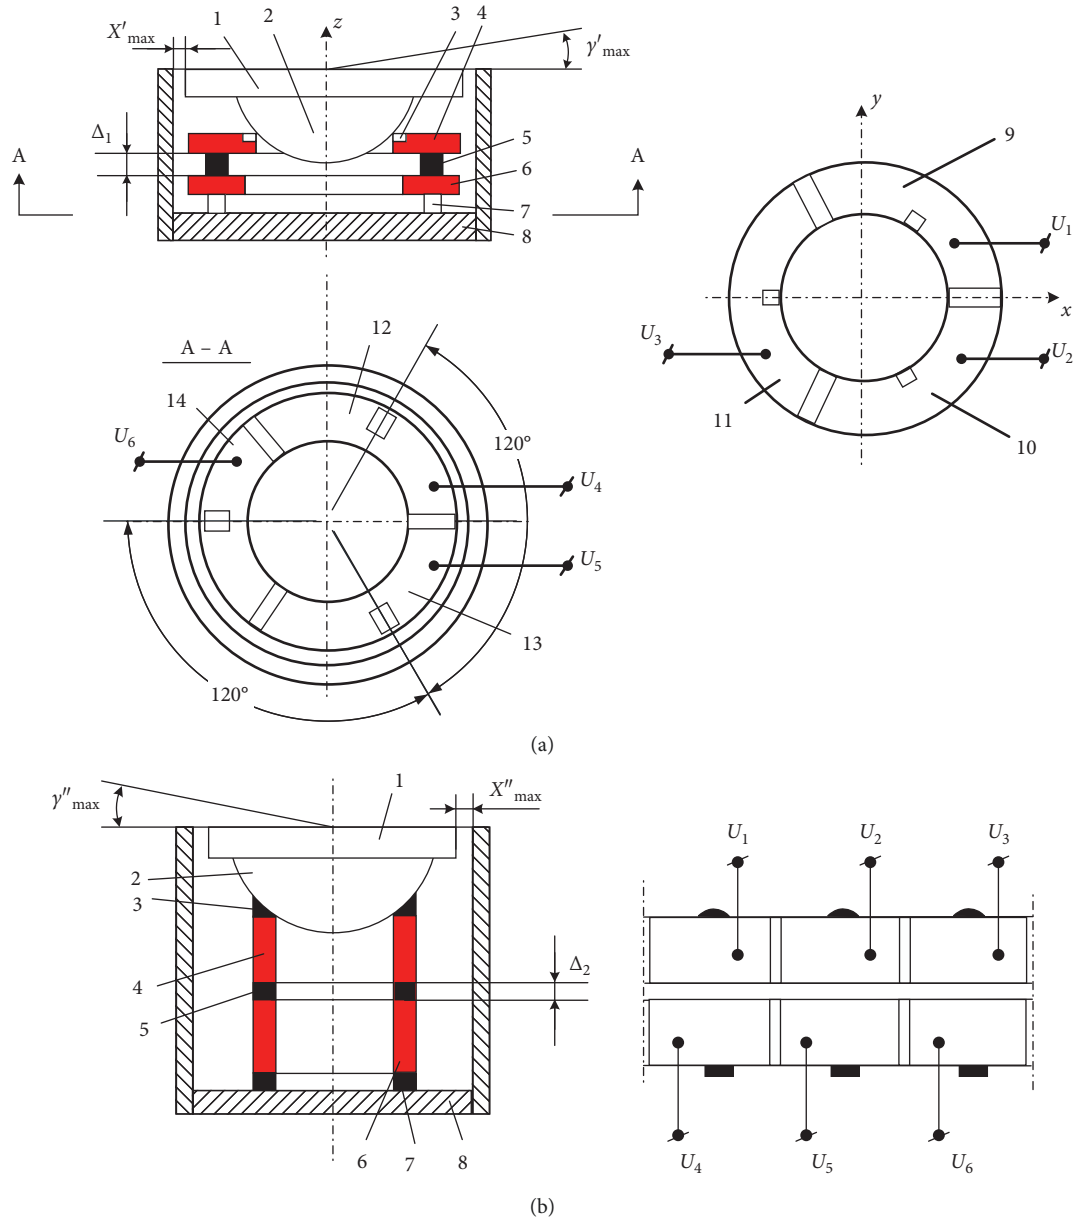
6-DOF laser beam positioning actuator: ring type (a) and cylinder type (b).
